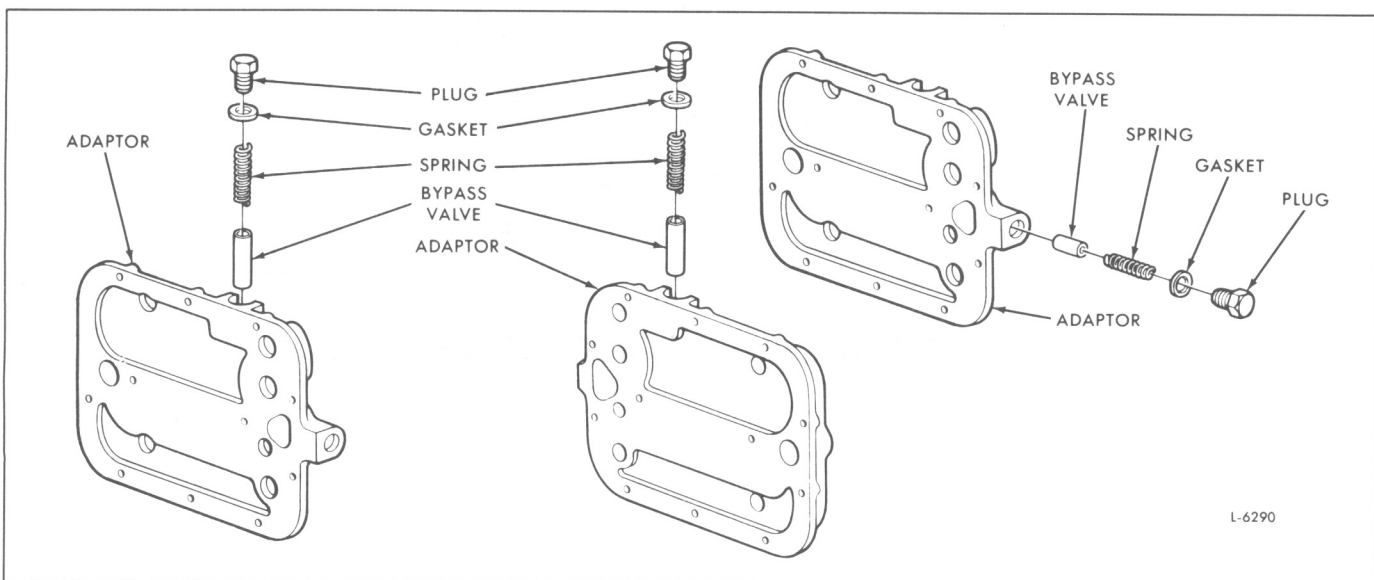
Oil Cooler Adaptors with Bypass Valve Assembly Components
